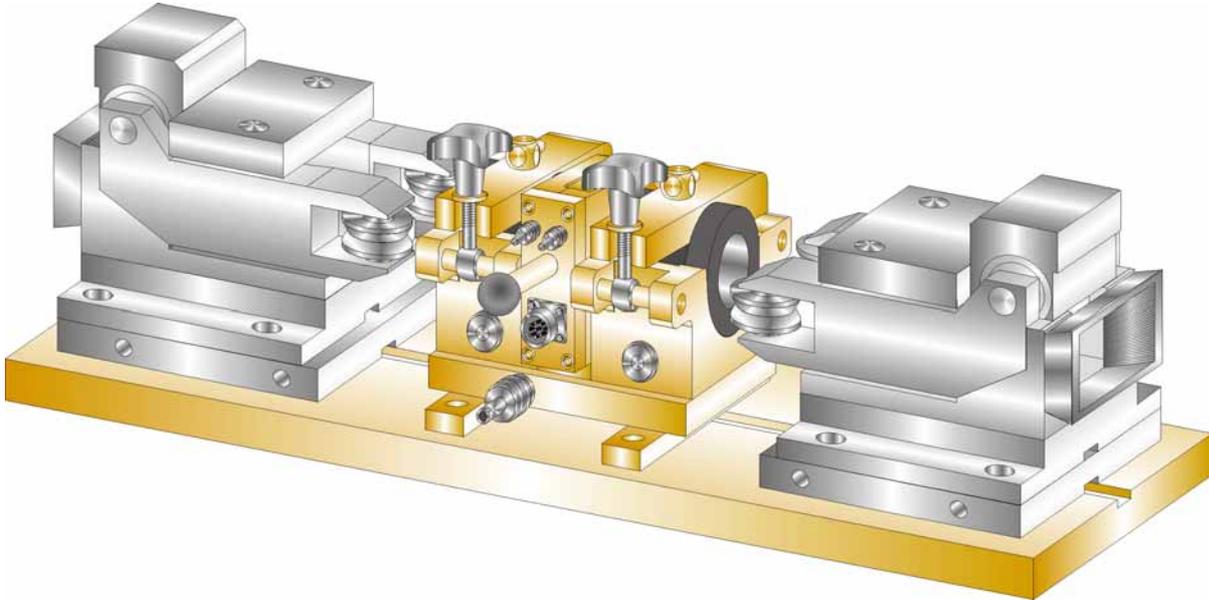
Coil carrier with roller guide, planned by the roll mill outfitter
